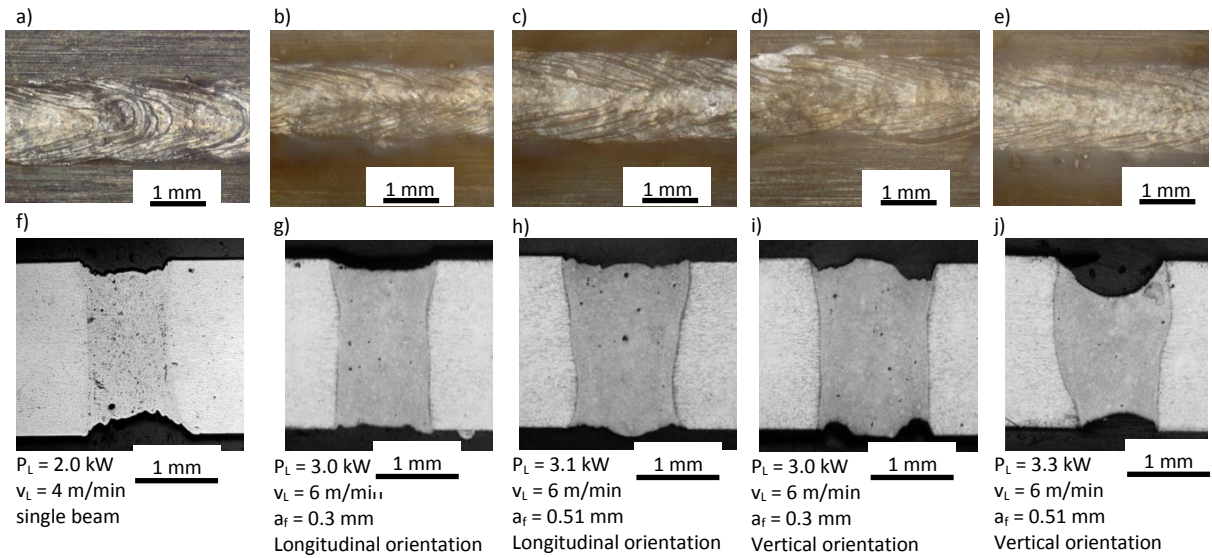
Weld seams welded with 200 μ m diameter dual beam at 2 mm sheets of AA 7075; a) reference with single beam; b) to d): top view of weld seams with welding velocity of 6 m/min and with different distances of foci of 0.3 mm and 0.51 mm (a_f) and orientations; f) to j) cross sections according to top views
